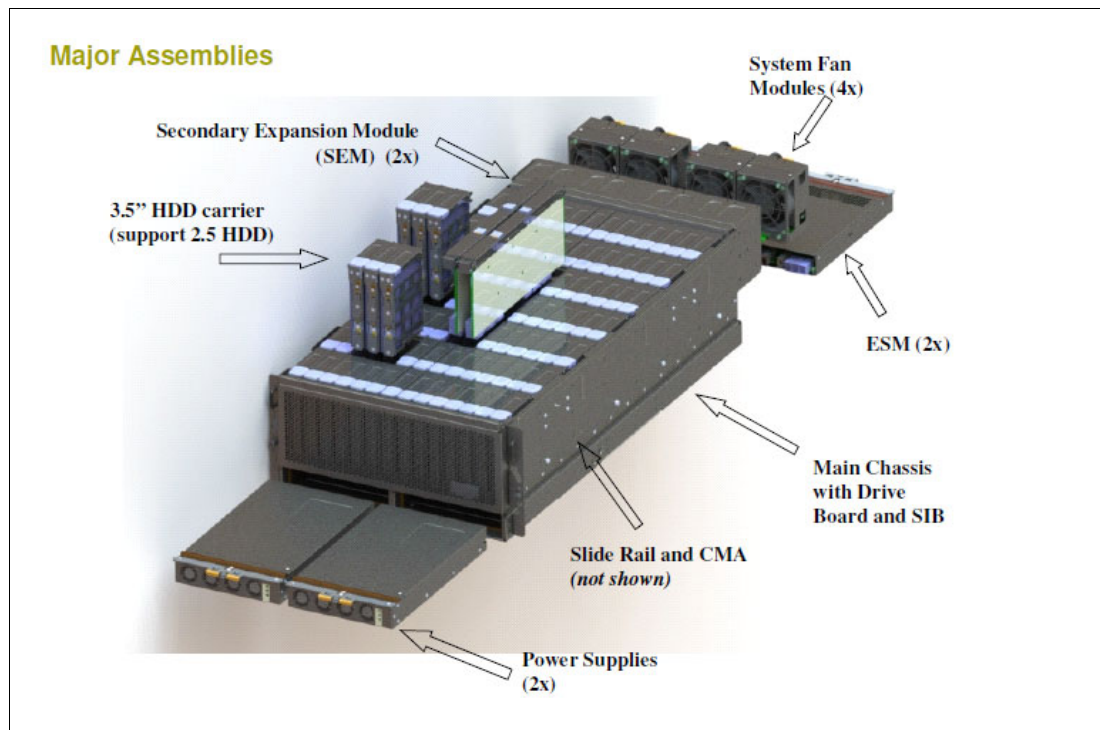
Inside view of the 9848-92F expansion enclosure
